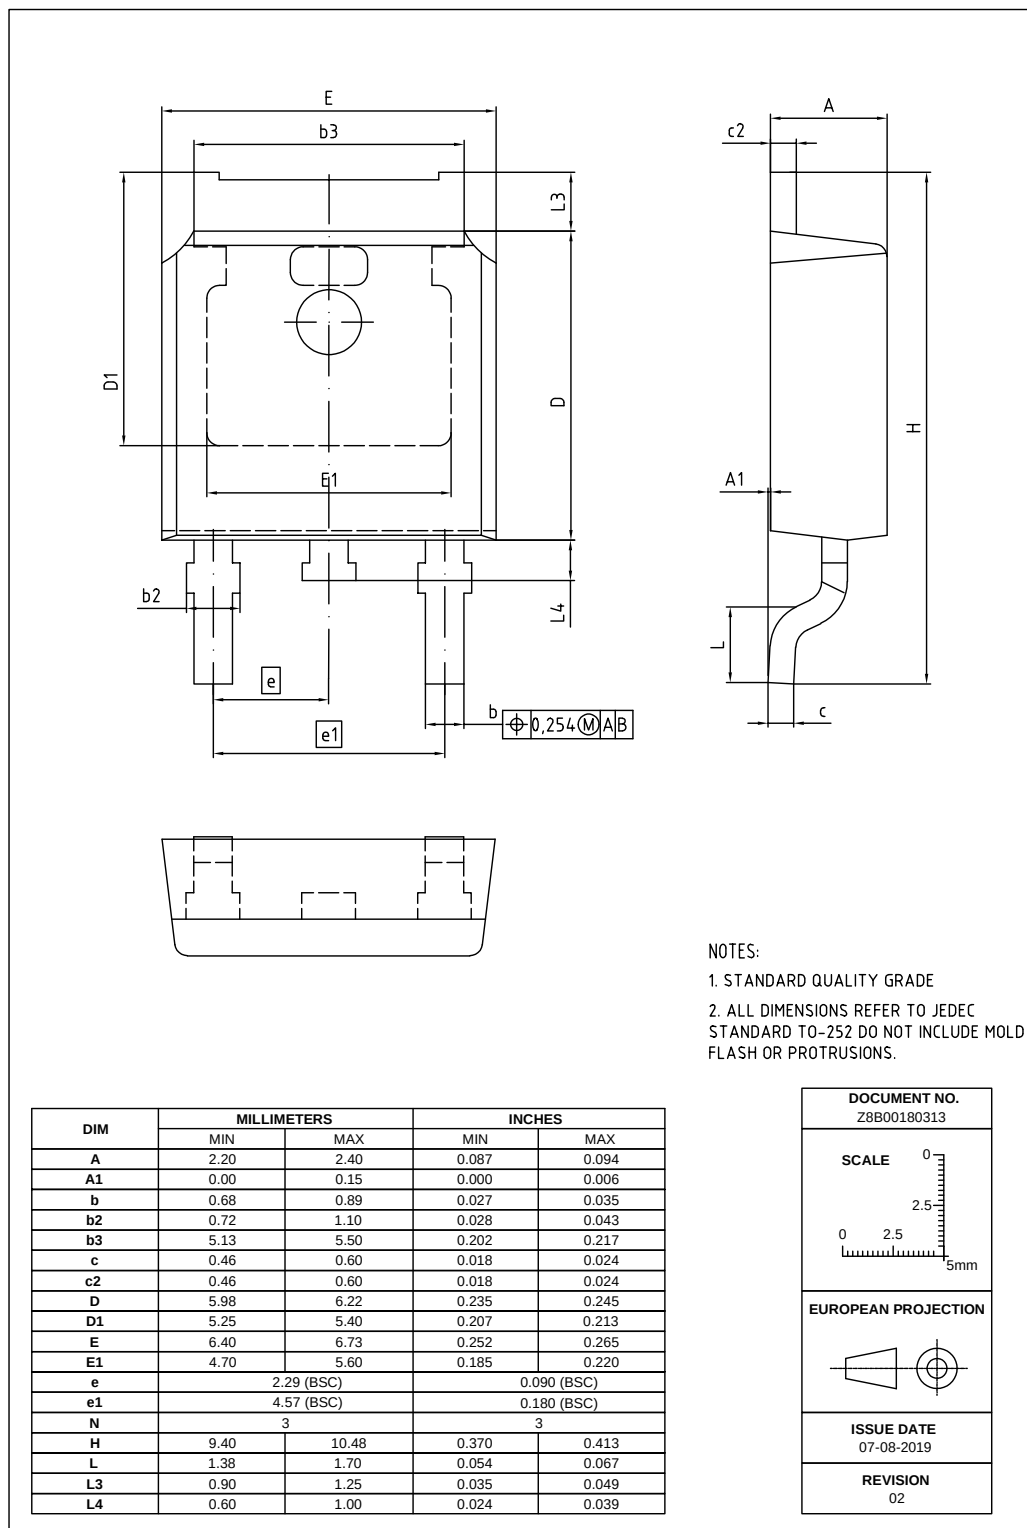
Outline PG-TO 252-3, dimensions in mm/inches
